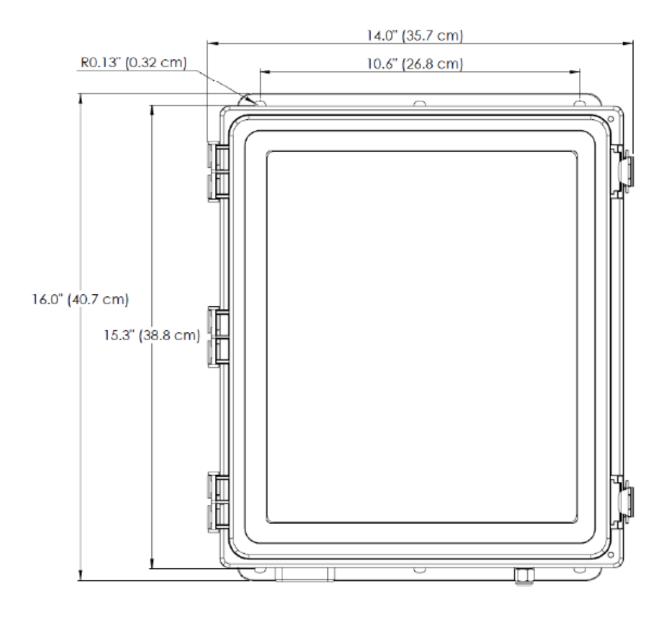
Industrial Enclosure Dimensions (Front View of standard single-port configuration).
